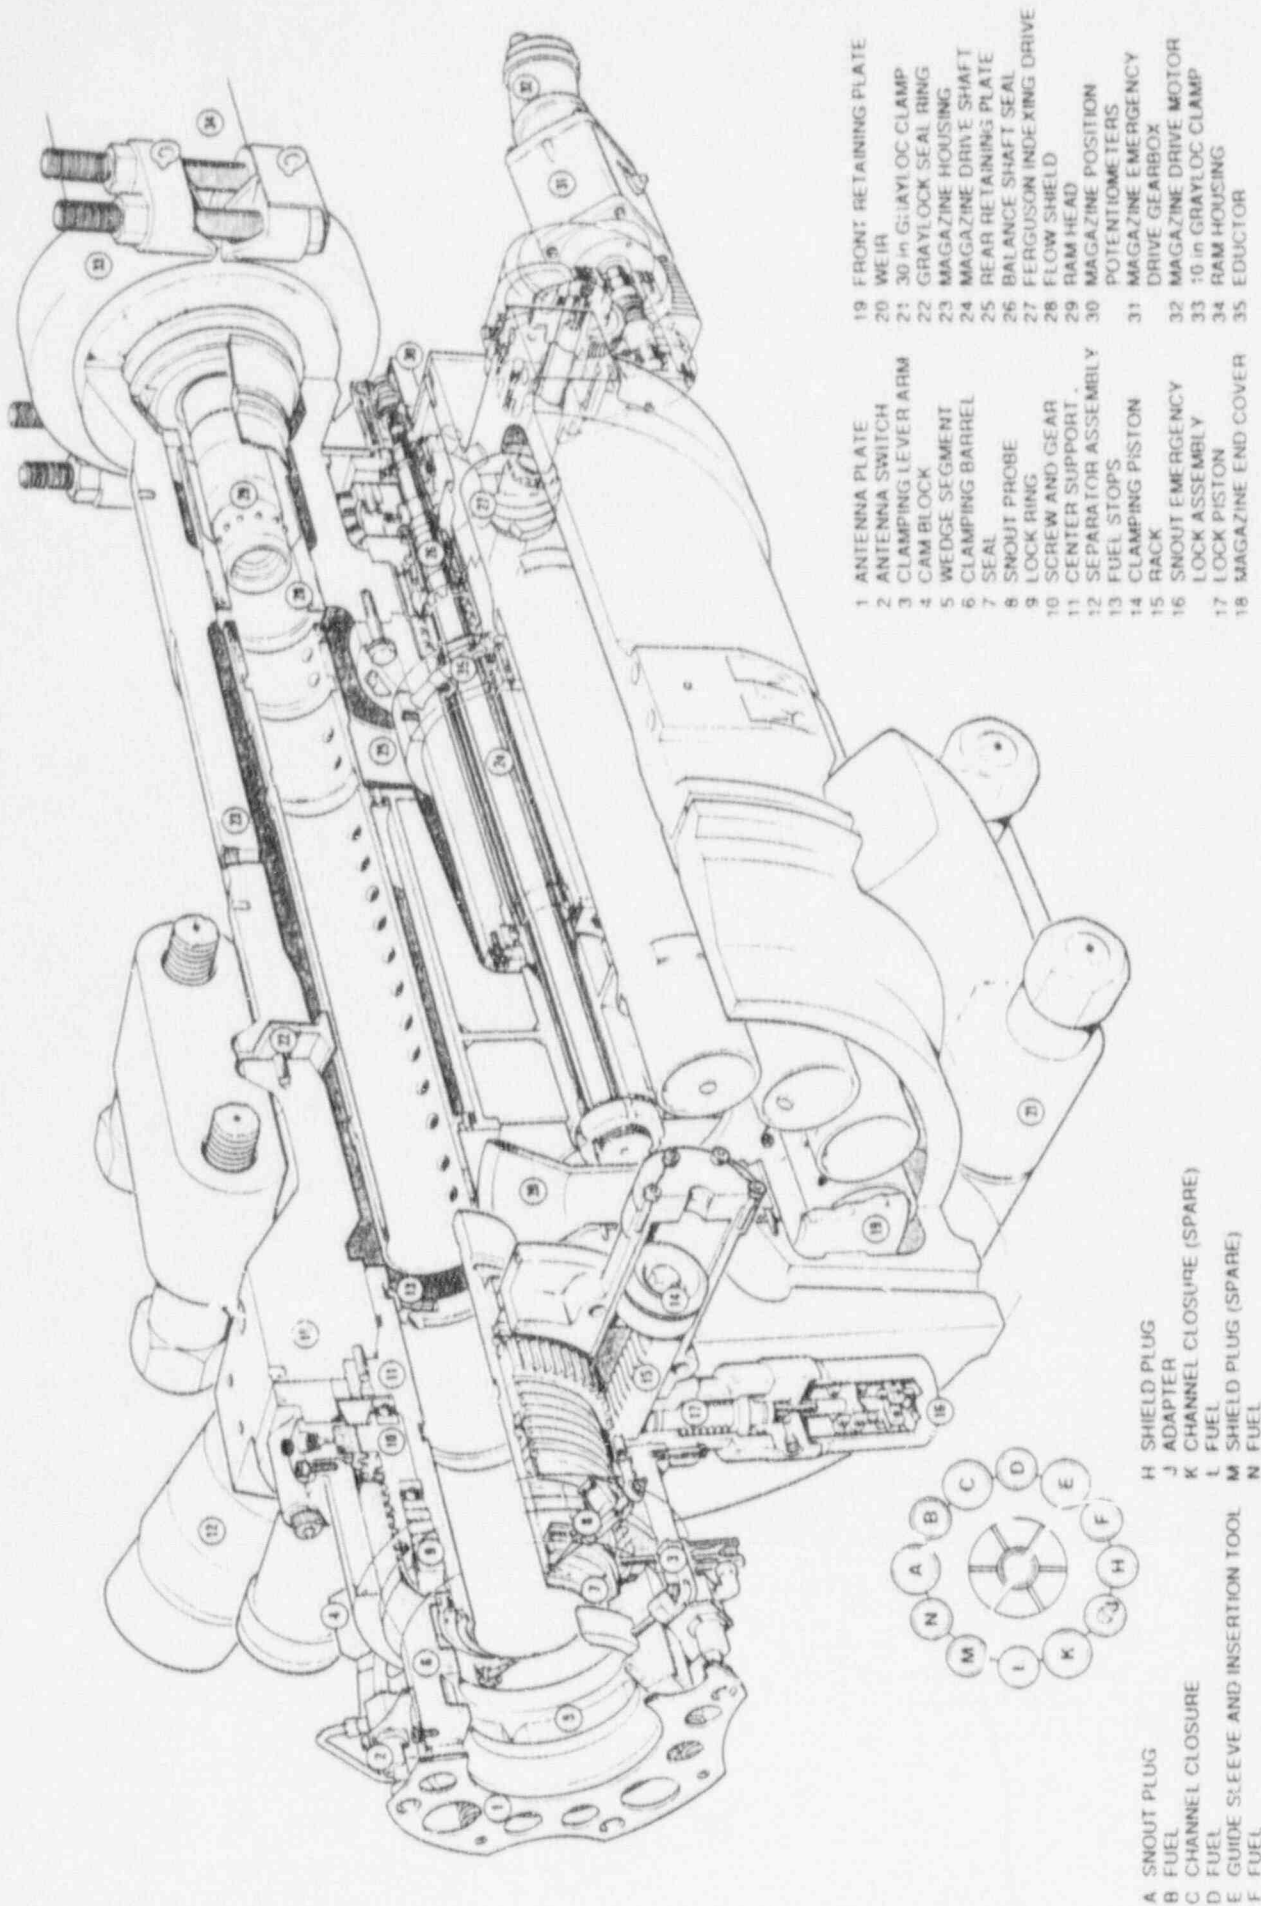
MAGAZINE ASSEMBLY FUELING MACHINE HEAD
